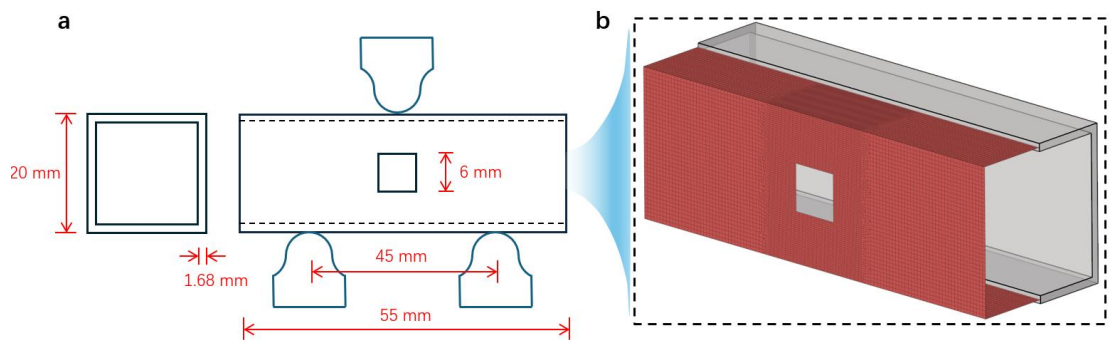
Experimental set up for the three-point bending test with square tube specimen
